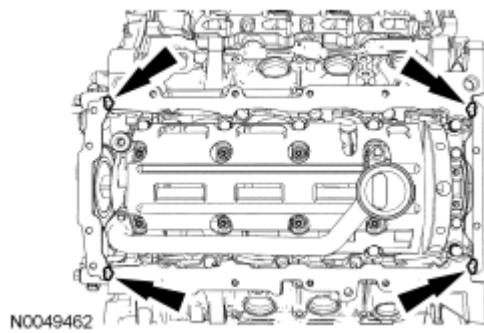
Applying Silicone Gasket & Sealant At Engine Front Cover-To-Cylinder Block Sealing Joints
